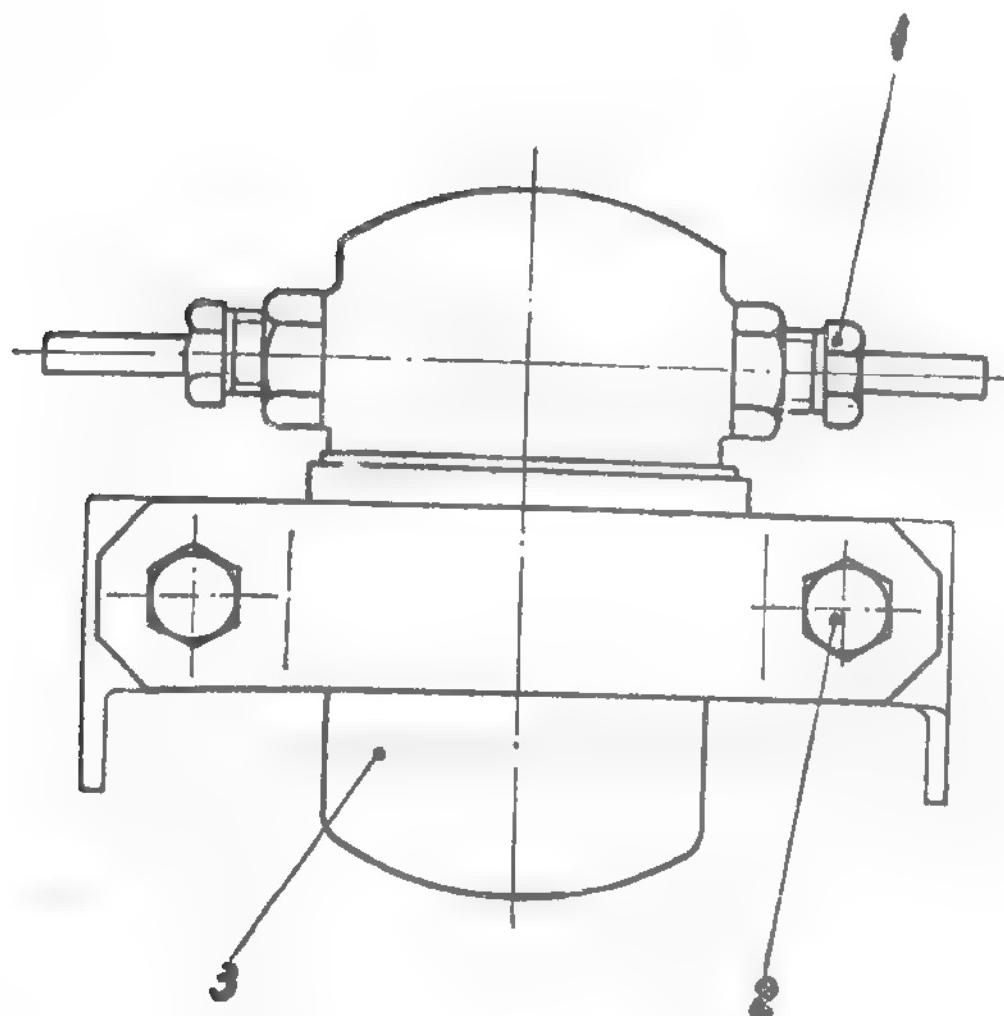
1. Fuel line connecting nut; 2. Bolt fastening fuel filter blade; 3. Lower filter body.
